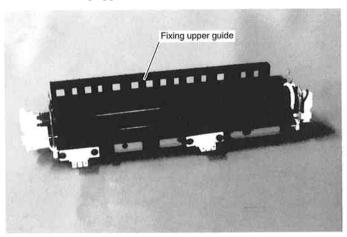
Disassembly Procedure (Fixing Upper Guide)
